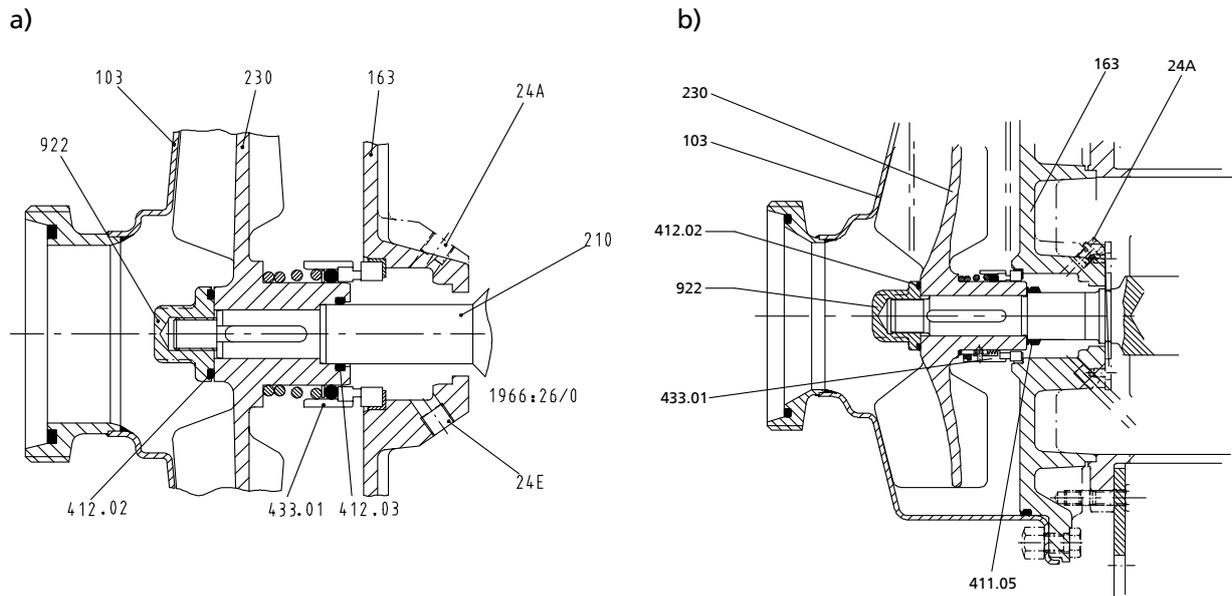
Single mechanical seal a) with O-ring (size group I) b) with V-ring (size group II)
